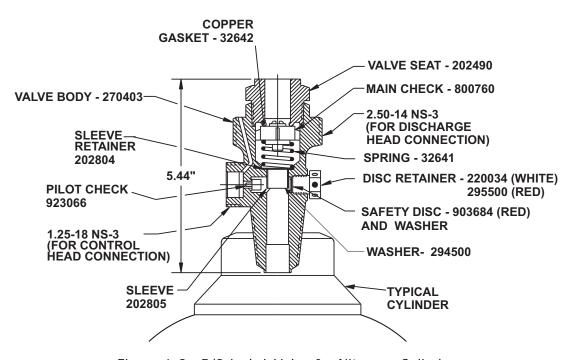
5/8-inch I-Valve for Nitrogen Cylinder
